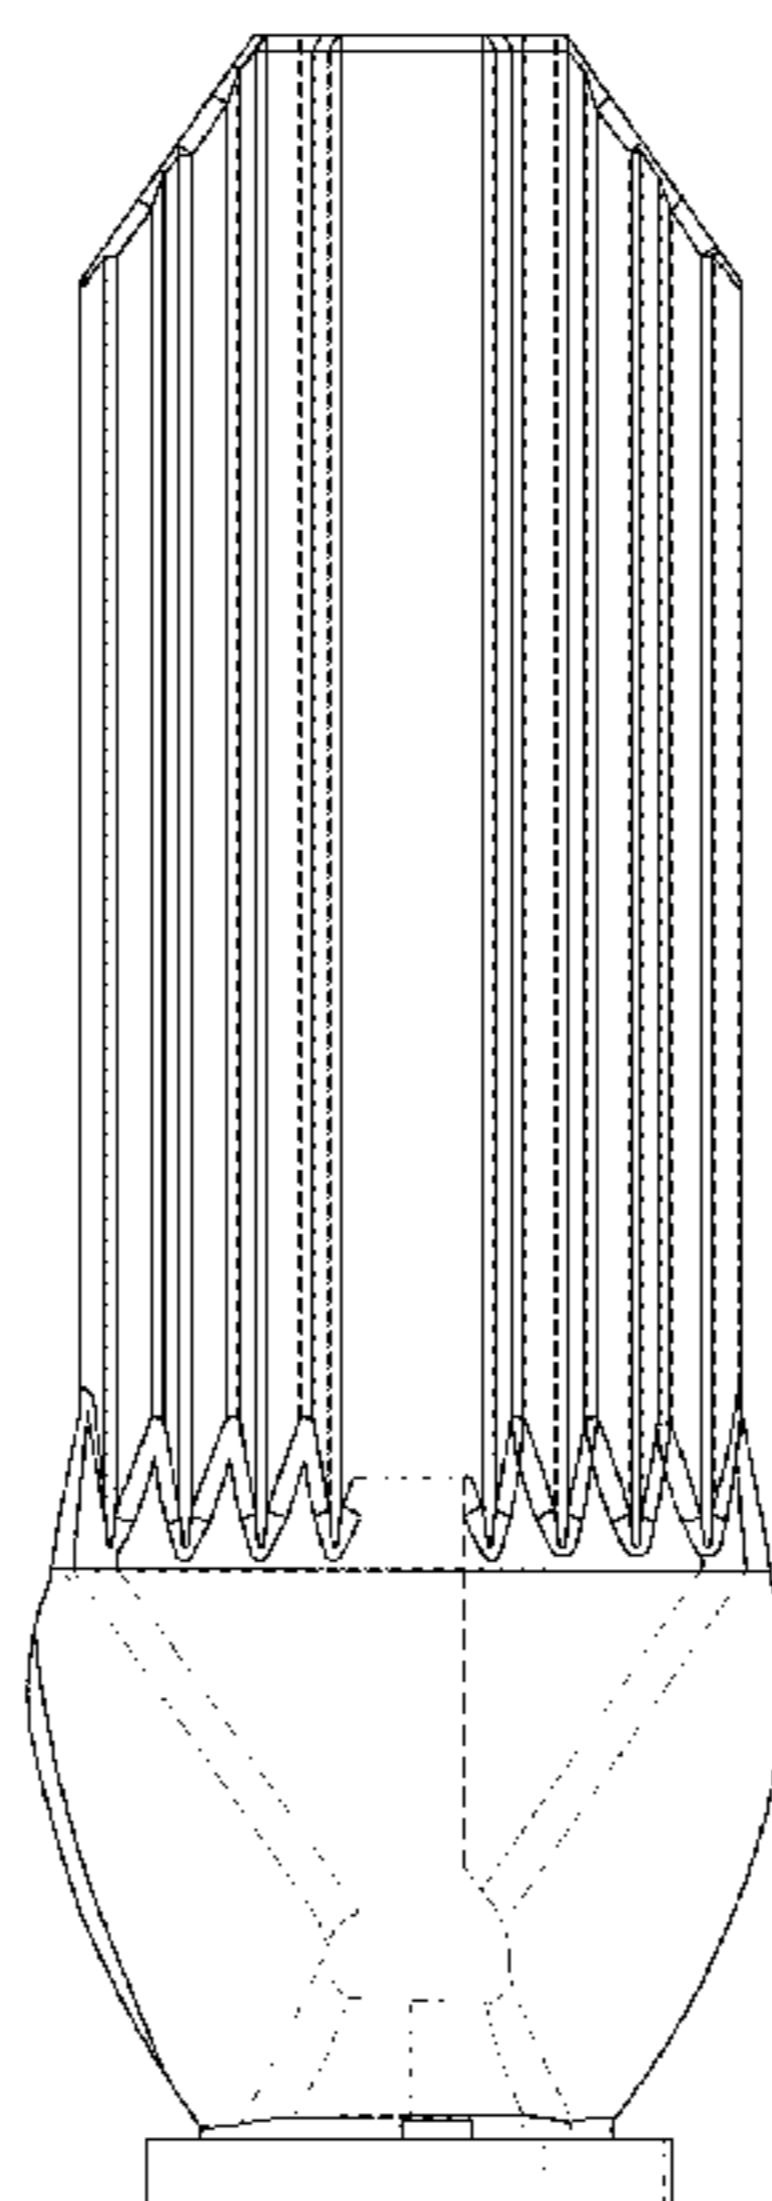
is an enlarged perspective view of a portion of the heat exchanger shown in FIG. 3;
